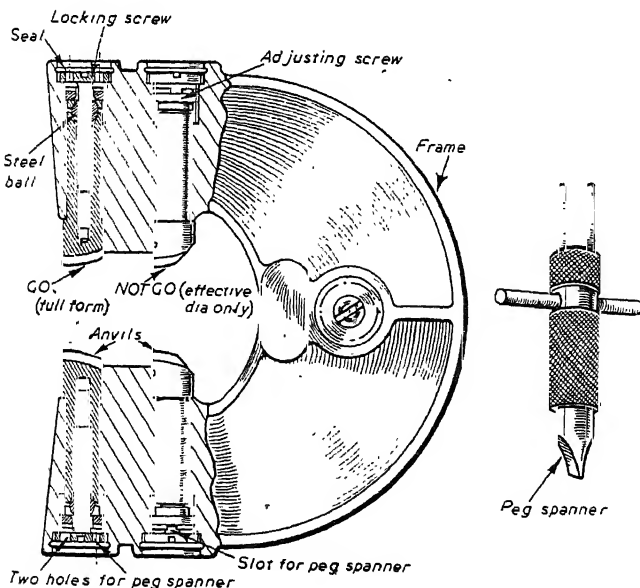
Showing the construction of the Wickman type of adjustable thread caliper gauge and details of the special peg spanner.
